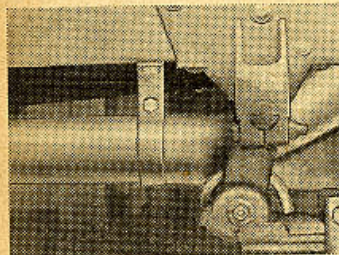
This is the exhaust-pipe clamp removed by OTAC crews to keep from breaking manifold bolts. Please to leave it off.
